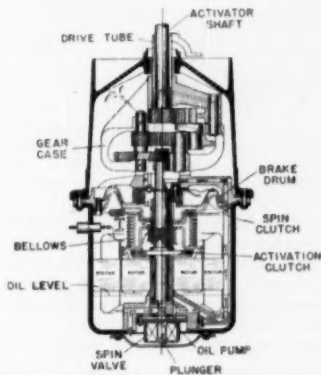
MOTOR, CLUTCH, AND GEARING ASSEMBLY FOR AUTOMATIC WASHER
